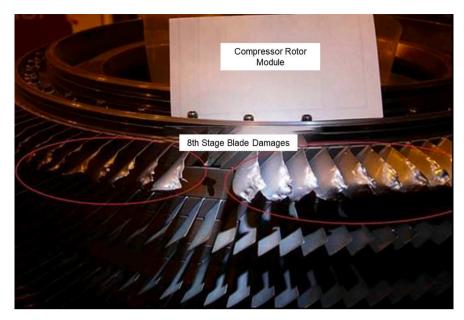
8th Stage Blade Damages on the Compressor Rotor Module.
